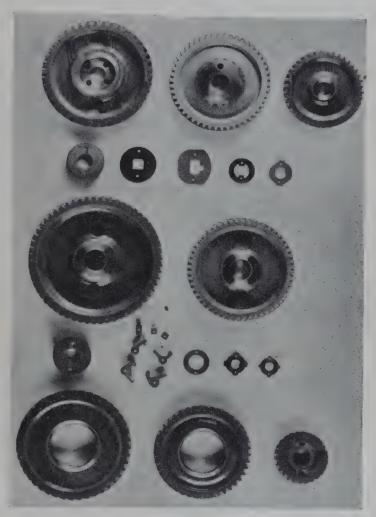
A group of laminated plastic automotive parts, including timing gears, cam gears, distributor breaker arms, magneto couplings, and insulating washers. (Courtesy of Bakelite Corporation.)
